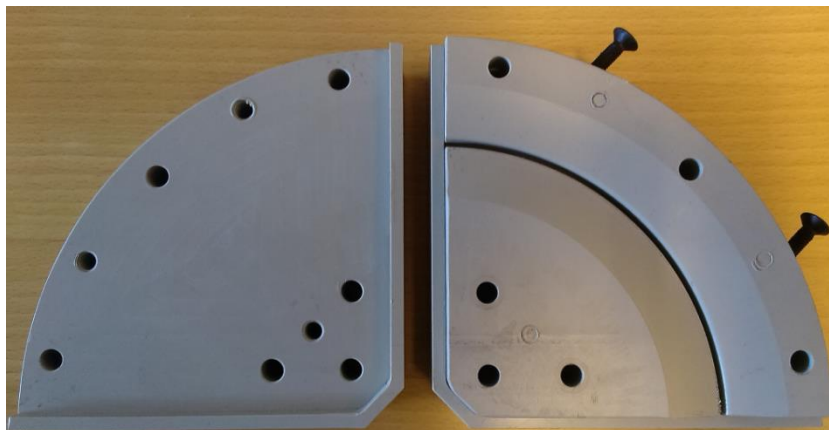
Dual faced peel stopper mould. The mould has the shape of a quarter of a circle.
